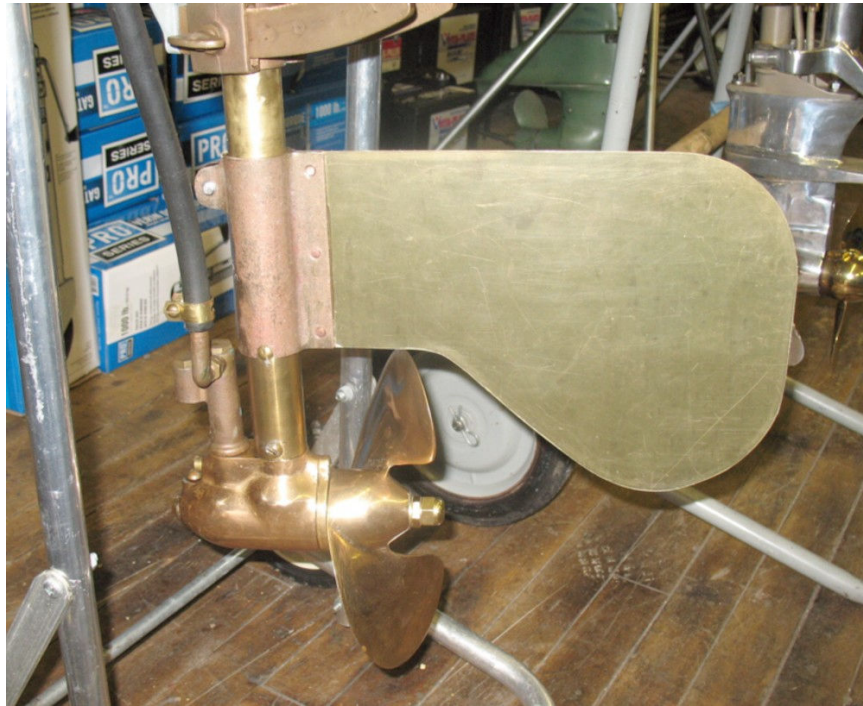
Rudder blade riveted into place, and installed onto a motor
